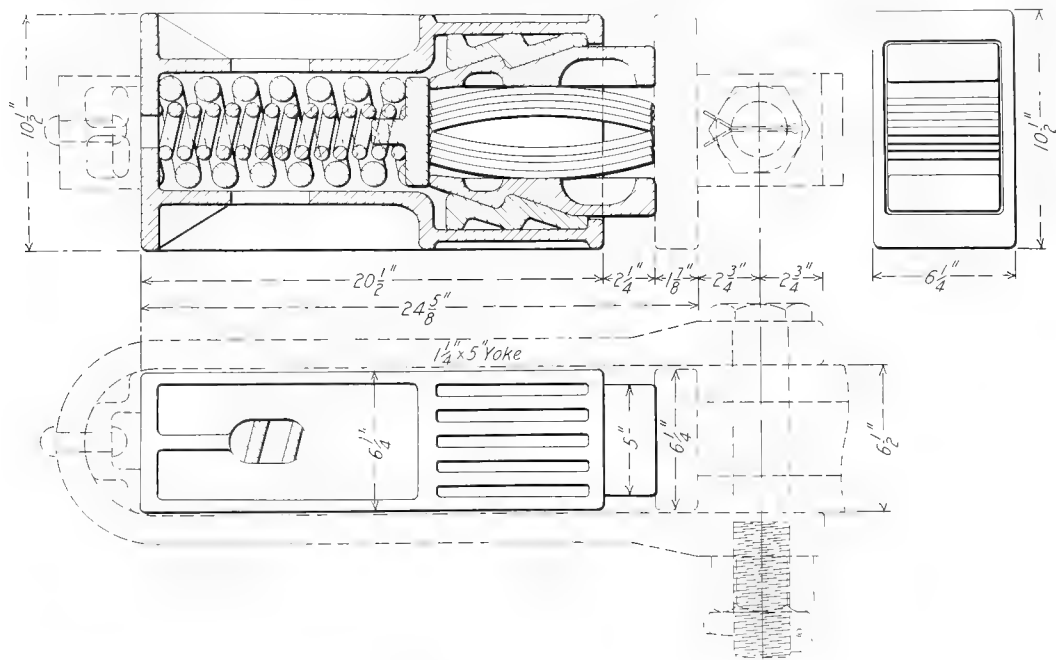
Gould Passenger Friction Draft Gear FDG-56. Gould Coupler Company.
